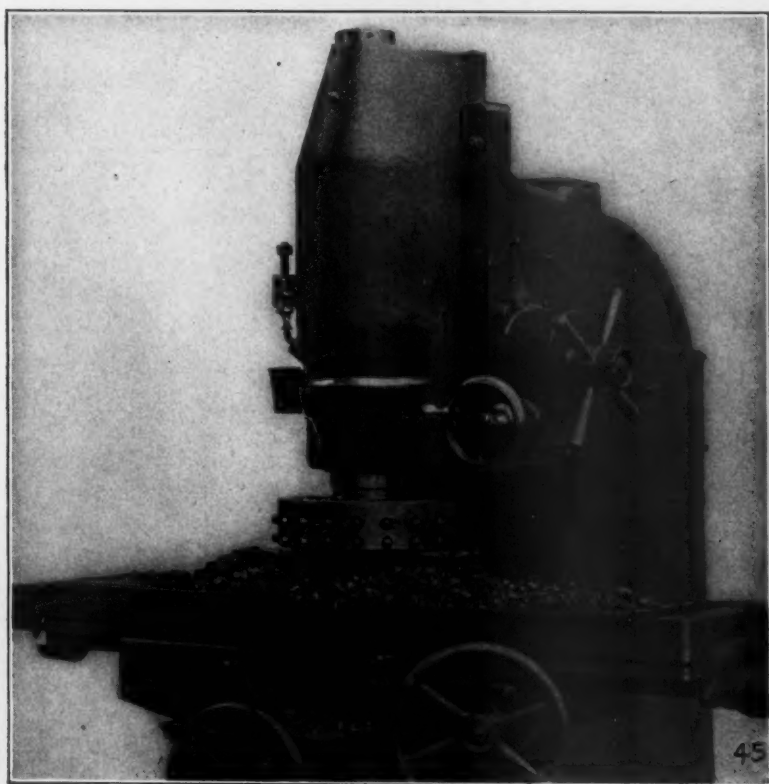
HIGH POWER VERTICAL MILLING MACHINE, REMOVING 10 CUBIC INCHES OF MATERIAL PER MINUTE FROM FORCED STEEL BARS. CUT  $\frac{1}{8}$  IN. DEEP AND 5 IN. WIDE. FEED 16 IN. PER MINUTE.
